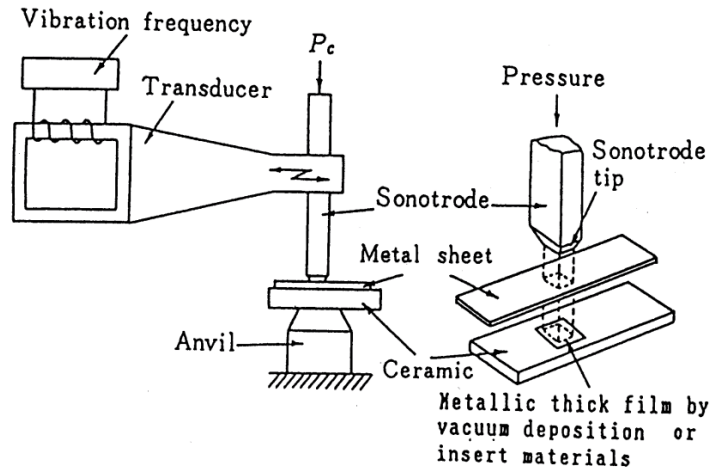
Ultrasonic welding scheme process [20]
